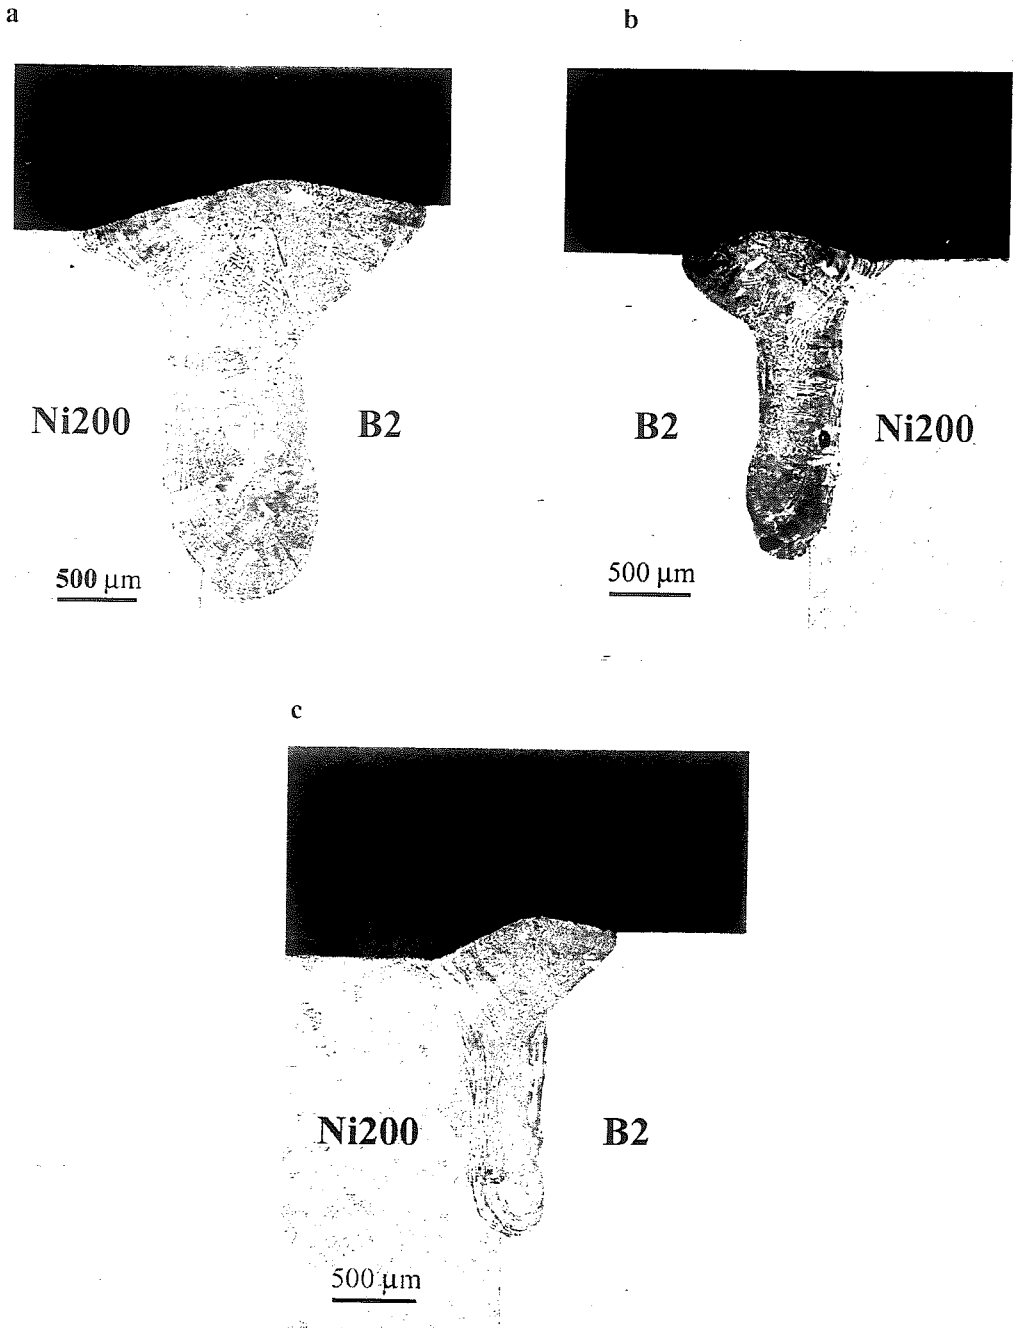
B) Dissimilar metal welds showing dimensional changes with travel speed.
